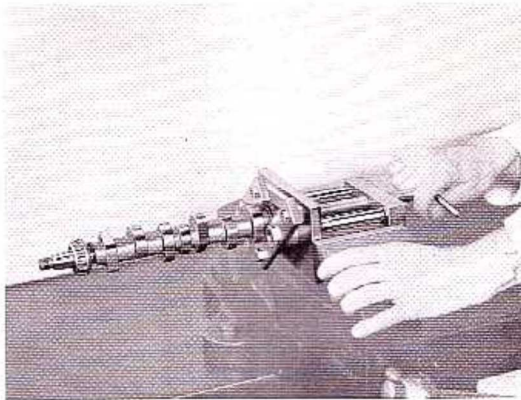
WITHDRAWING ROLLER RACE FROM CAMSHAFT USING TOOL 7144/436A
